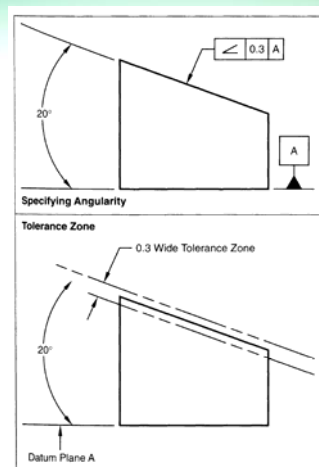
Angularity tolerance applied to a surface
